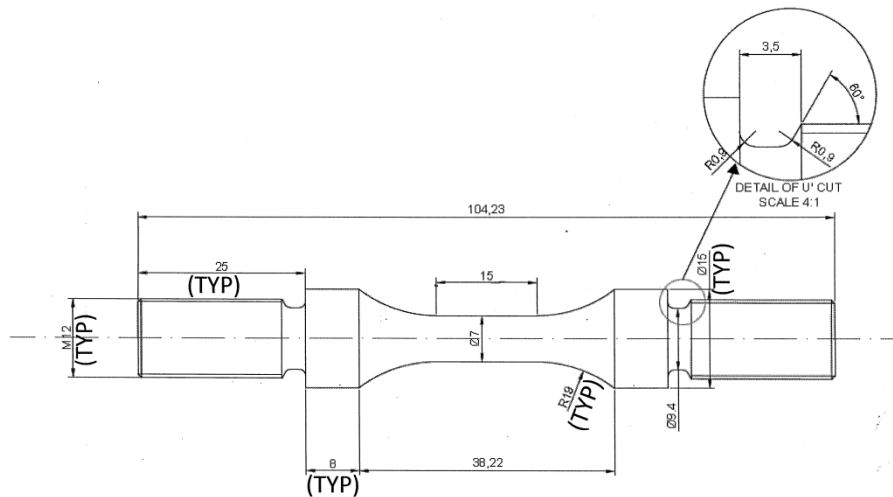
Specimen geometry used for tensile testing. All dimensions are in mm. M12 threads were used for fixing the samples into the test machine. The dimension of the gauge length is 15 mm.
